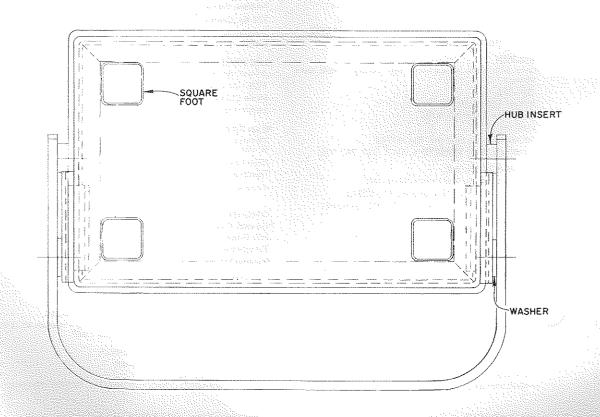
Complete cabinet assembly (P/N 4182-2328).
